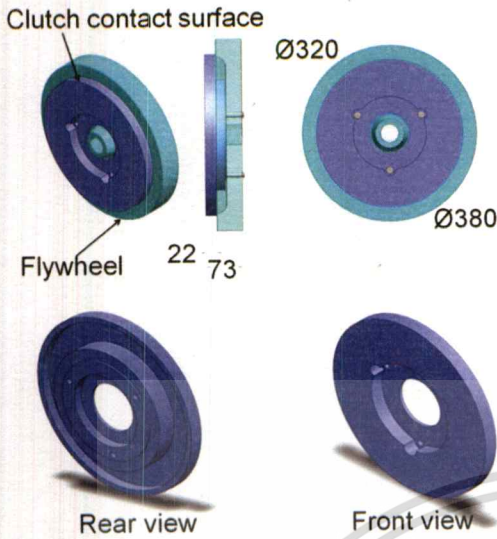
Clutch contact surface prototype model (all dimensions in mm)
